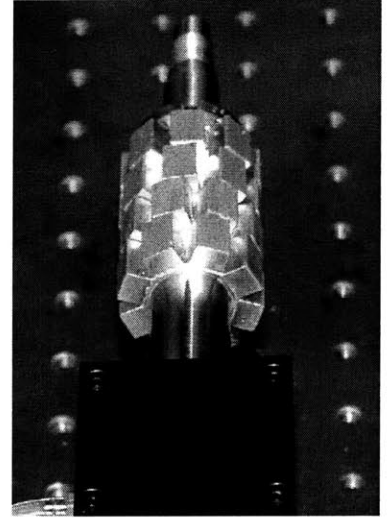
Shaft geometry and assembled components. The shaft is 0.75 inches (1.91 cm) in diameter in the center and 15.23 inches (38.68 cm) long.
